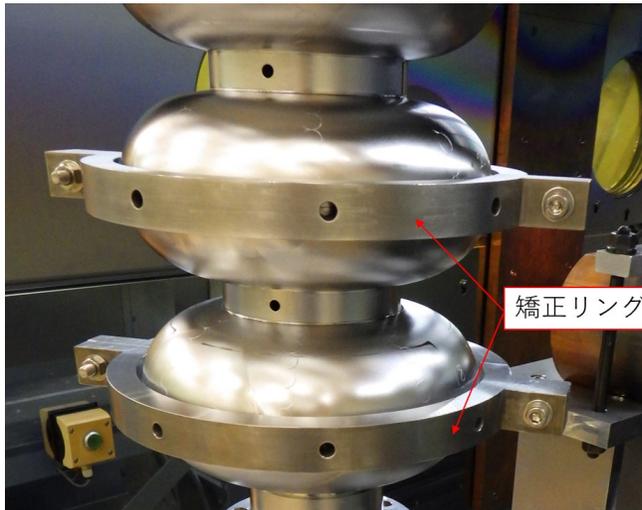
Prototype RF-measurement machine (called HAZEMEMA)
